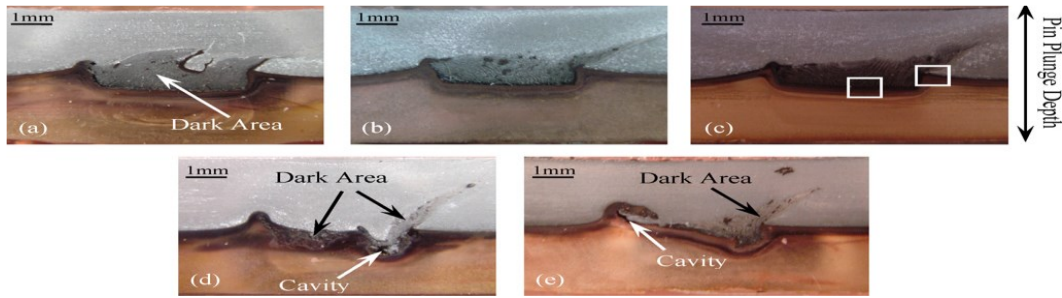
Macroscopic overviews of the FSW joint cross sections at constant tool rotational speed of 1180rpm and welding speeds of (a) 30, (b) 60, (c) 95, (d) 118, and (e) 190 mm/min [7].
